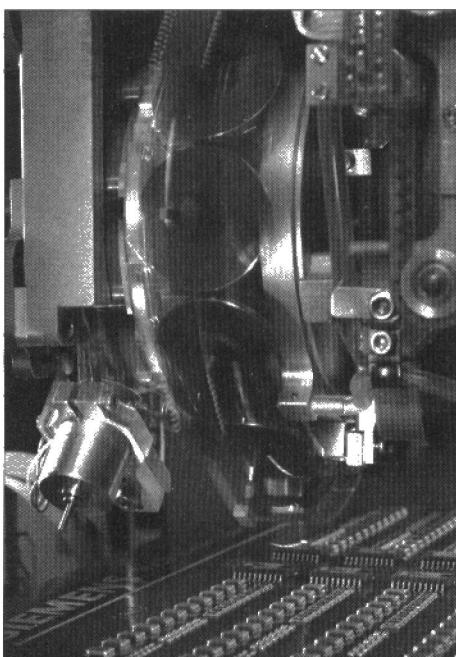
Reflow soldering is inevitably linked to accurate placing of SMDs. This SIPLACE machine from Siemens does a terrific pick and place job at about 20,000 parts per hour (photograph courtesy Siemens).
